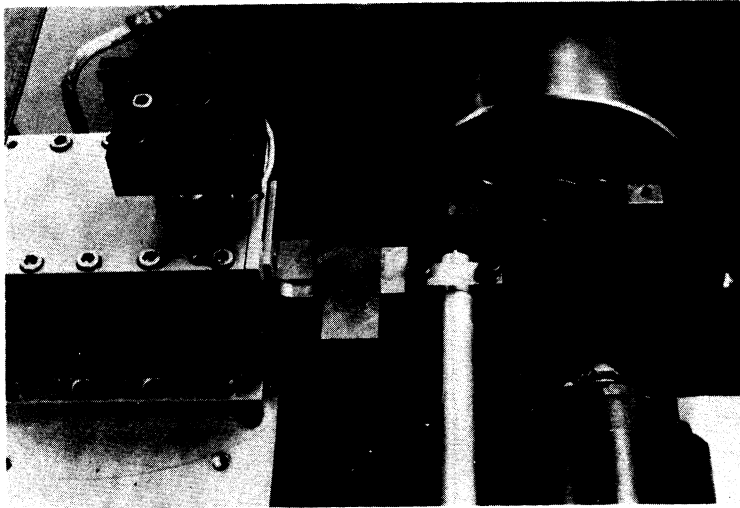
Set-up used to obtain cutting-force records shown in Figs. 22 and 23. Output of dynamometer shown at left was displayed on a Tektronix 502 oscilloscope. Workpiece is 1-in.-diam rod at lower center.
